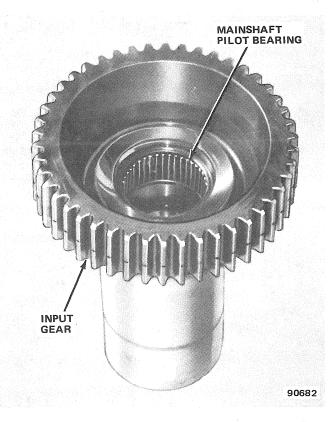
D-34 Mainshaft Pilot Bearing Installation
